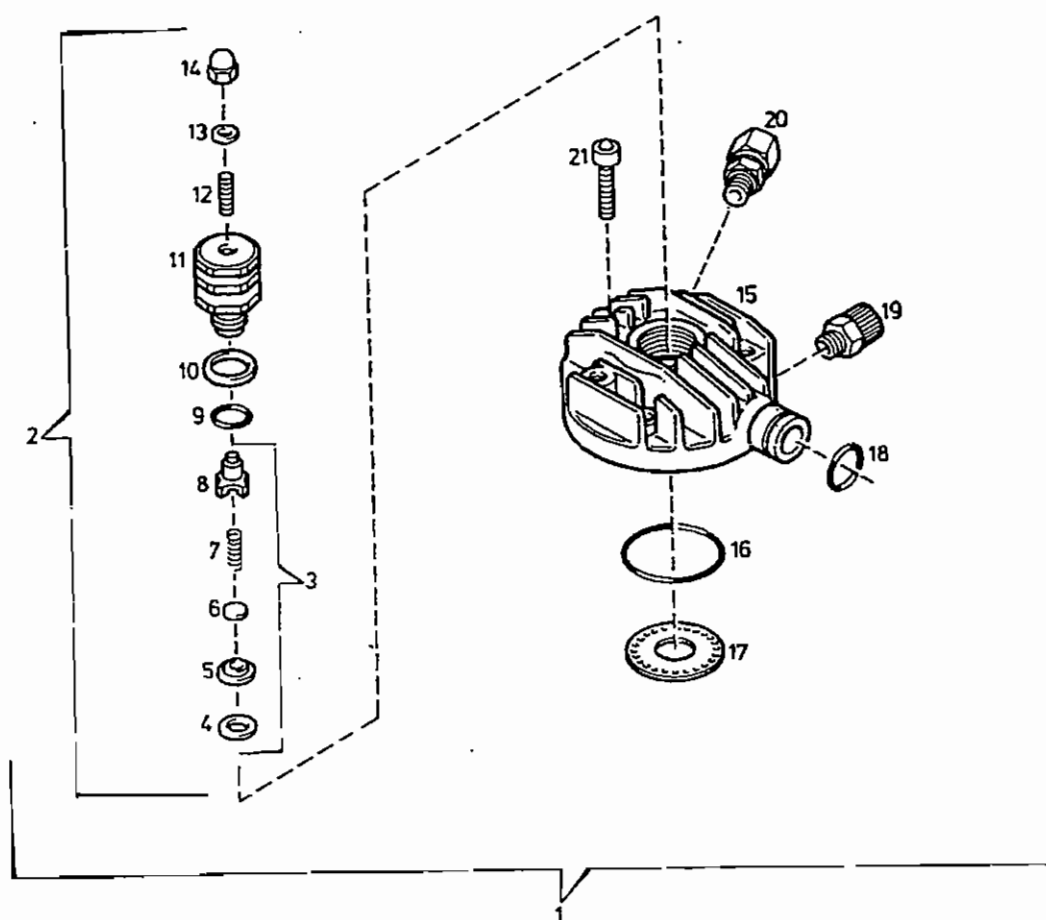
Valve head and valves, 1st stage KC-FH
